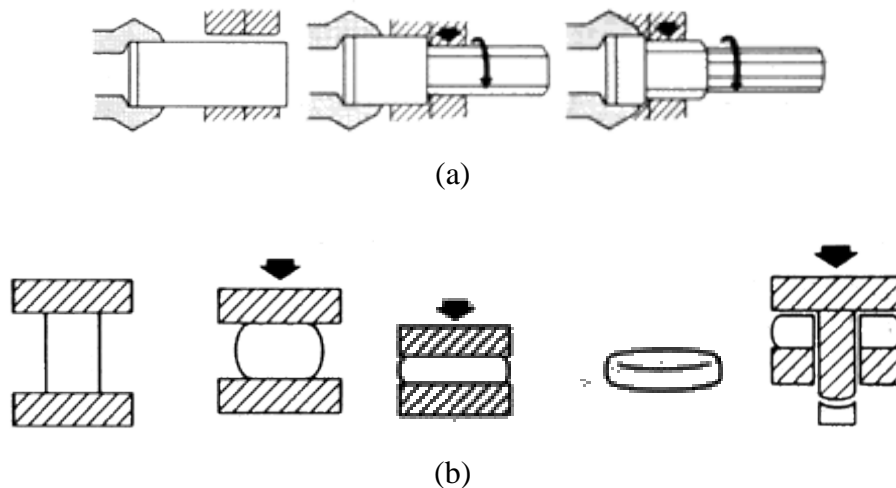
Open die forging process: (a) Forging of a solid cylinder (b) Forging of a ring with special dies³.
